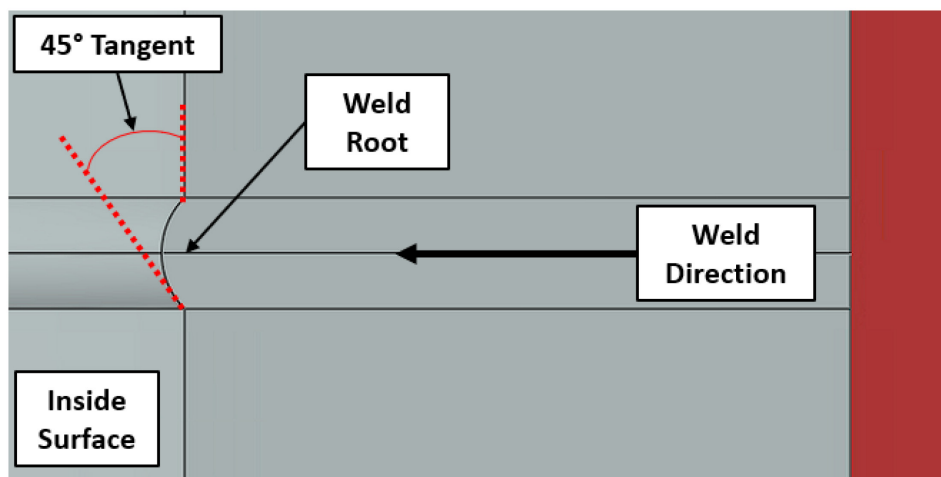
CJP Weld Root Geometry for Inaccessible Weld Surfaces
